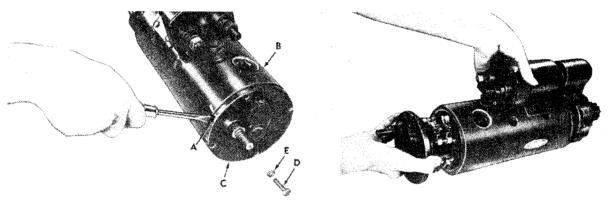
REMOVING LEAD ASSEMBLY AND DISCONNECTING FIELD COIL BRUSH ASSEMBLY.
